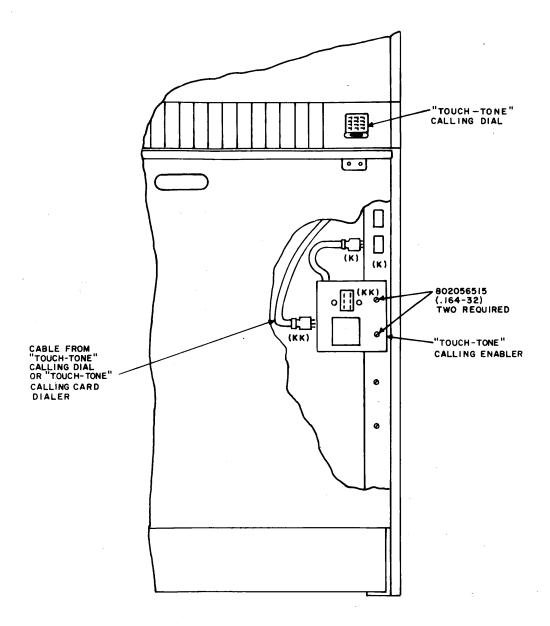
Installation of TOUCH-TONE Calling Enabler Unit for use With TOUCH-TONE Calling Dial and TOUCH-TONE Calling Card Dialer
